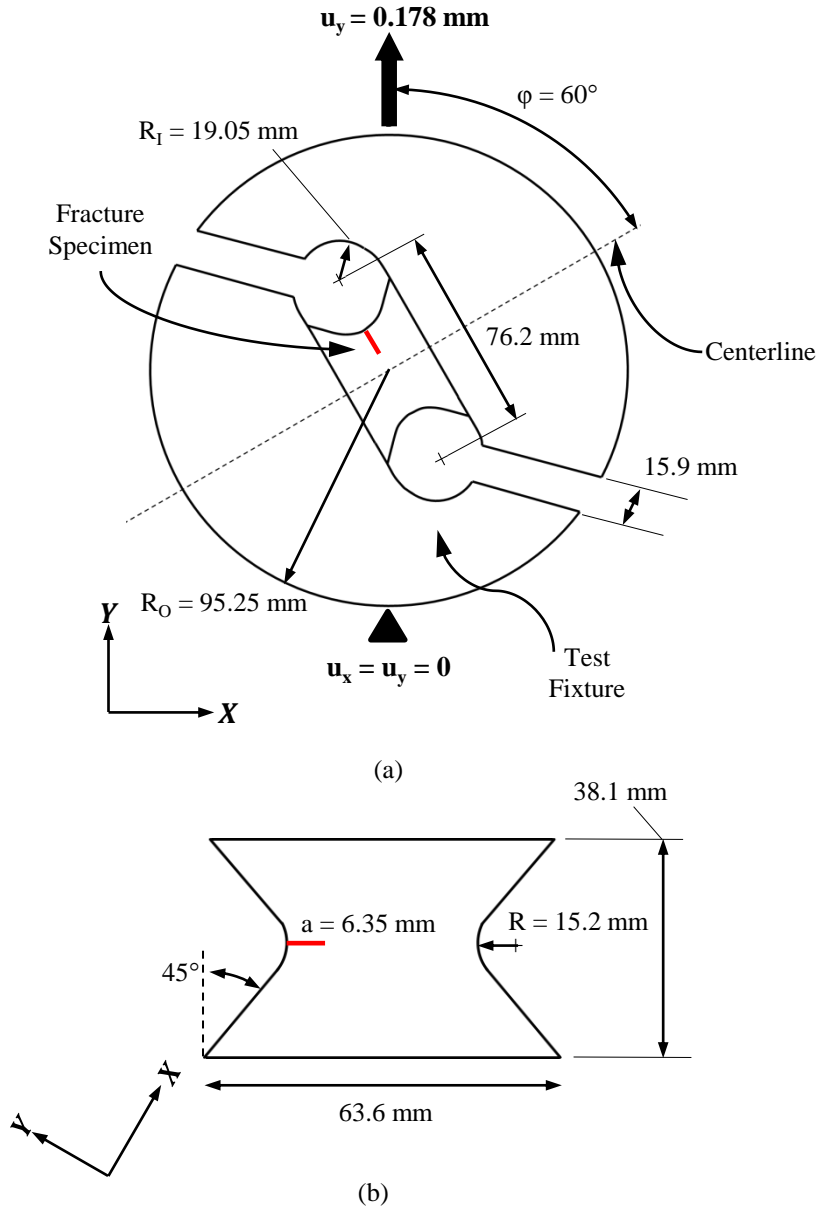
Geometry and loading conditions for the Arcan (a) test fixture, thickness of 18.3 mm and (b) fracture specimen, thickness of 2.29 mm.
